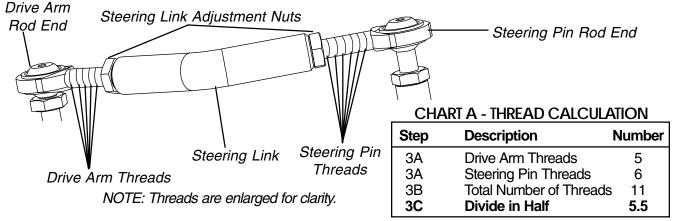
ADJUSTING CASTER AND DRIVE ARM ALIGNMENT
